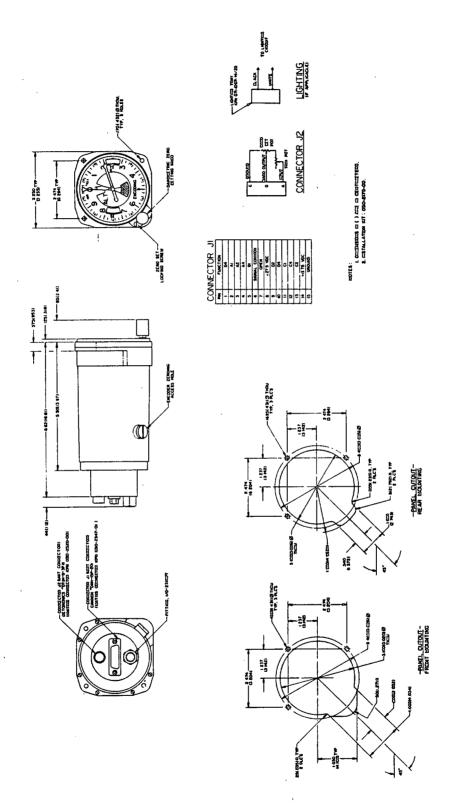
M KEA 130A INSTALLATION DRAWING
